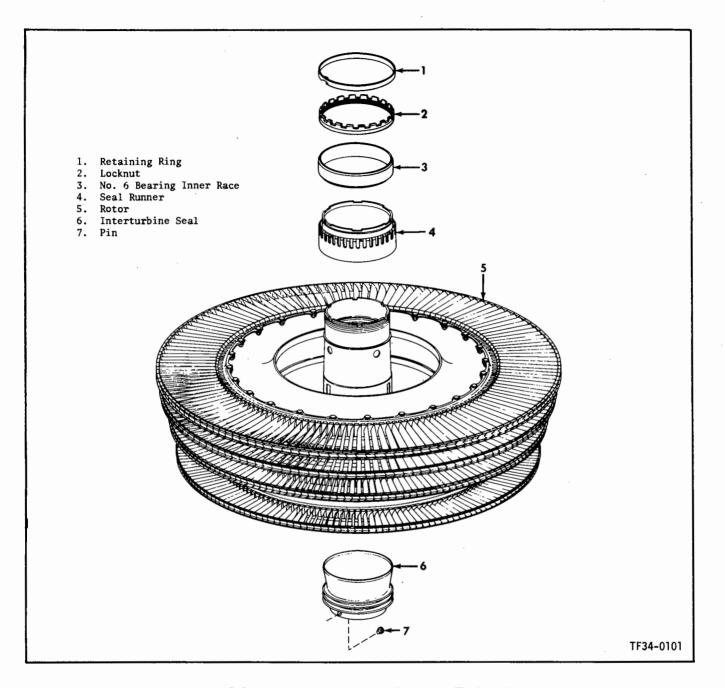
Disassembly of Low-Pressure Turbine Rotor
